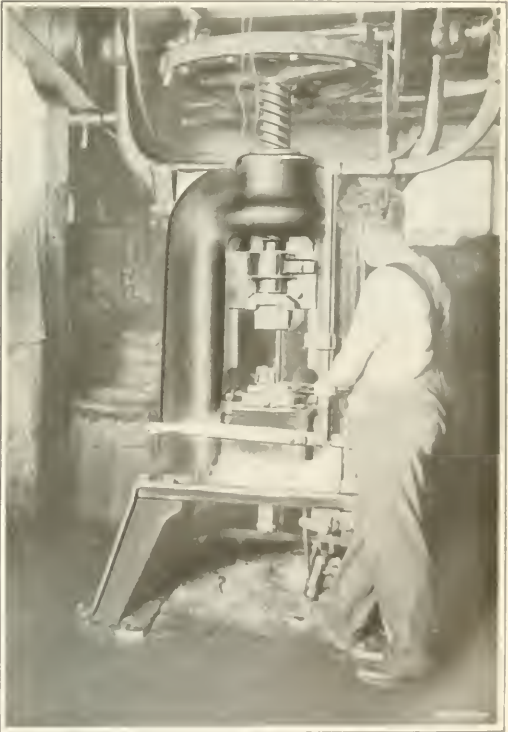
Zeh & Hahnemann Percussion Press used in hot-pressing Fuse Bodies
